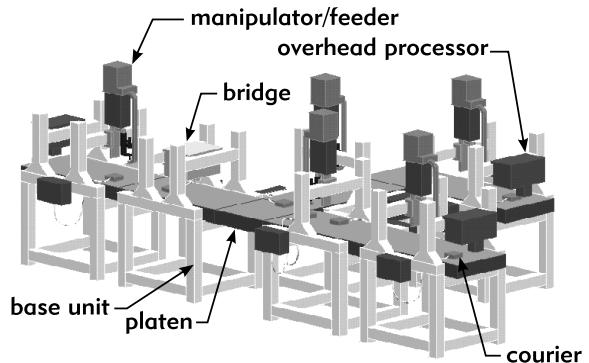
Minifactory design: Planar robot couriers transfer subassemblies between overhead assembly devices.
